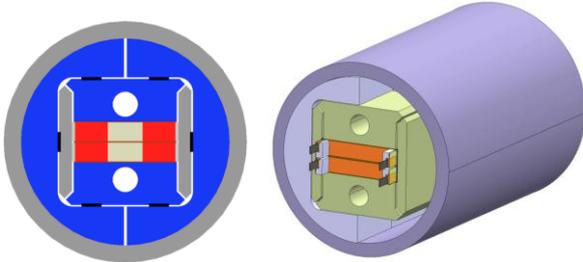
RMC cross section (left) showing the coil (red) iron yoke (blue) and structure (grey), and a CAD view of the assembled magnet in its shell (right).
